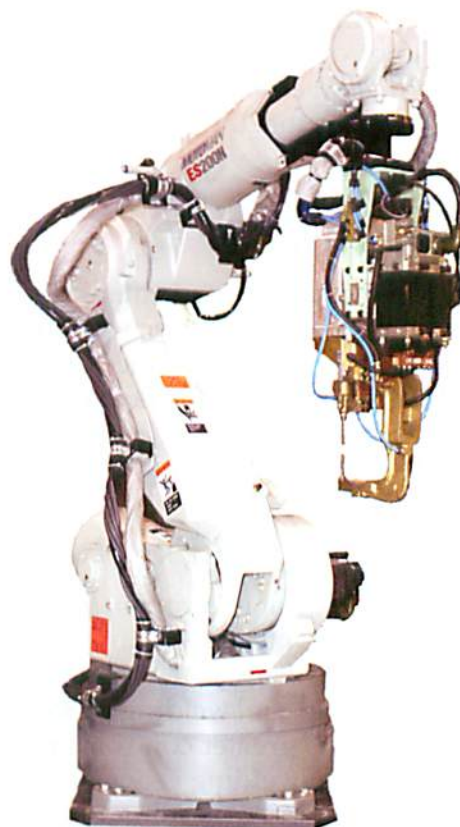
A robotic spot welder. Resistance welding is commonly used in fabricating automobile body sections. (Motoman, Inc.)
